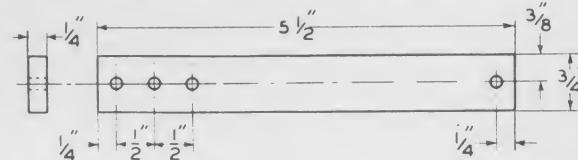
Outline drawing of plug-and-jack strips used to mount the 807 plate coil. The jack strip is mounted to the front frame screw and to the rear stator terminal of C_4 by means of aluminum brackets. The Mycalex strips come in 11-inch lengths and were obtained from the Allen D. Cardwell Co. Each length provides two coil strips.
